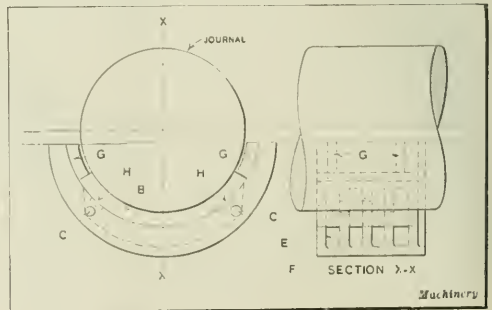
Redesigned Journal Box which simplifies Molding Problem
